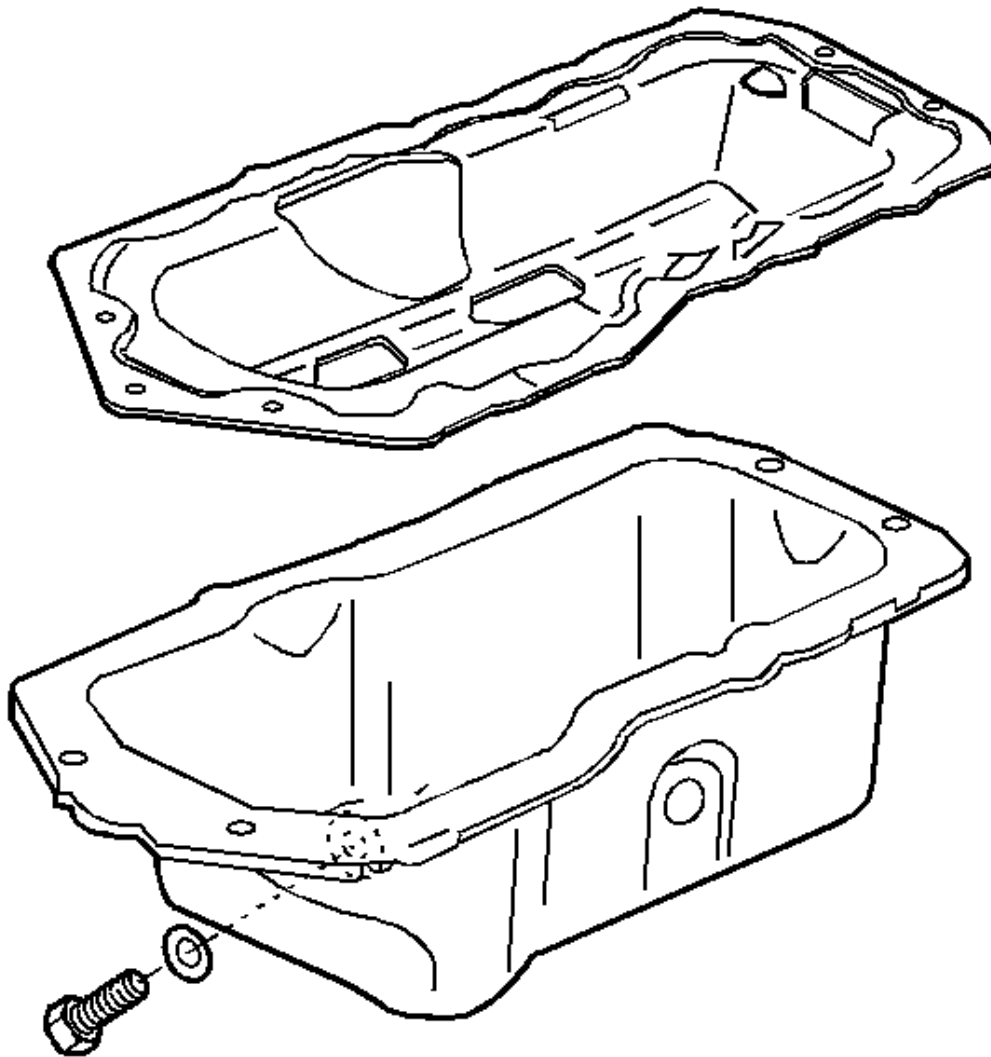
Removing Oil Pan & Oil Pan Gasket Windage Tray Gasket
